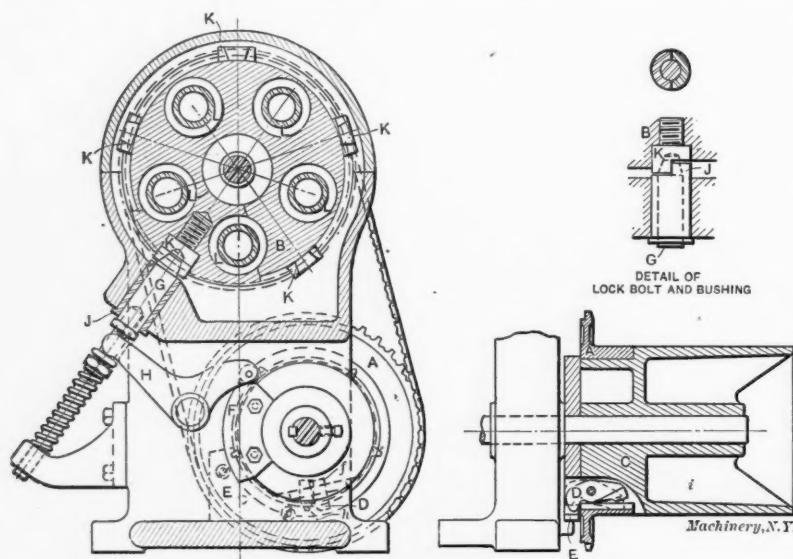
The Method of Indexing and Locking the Spindle Head.
